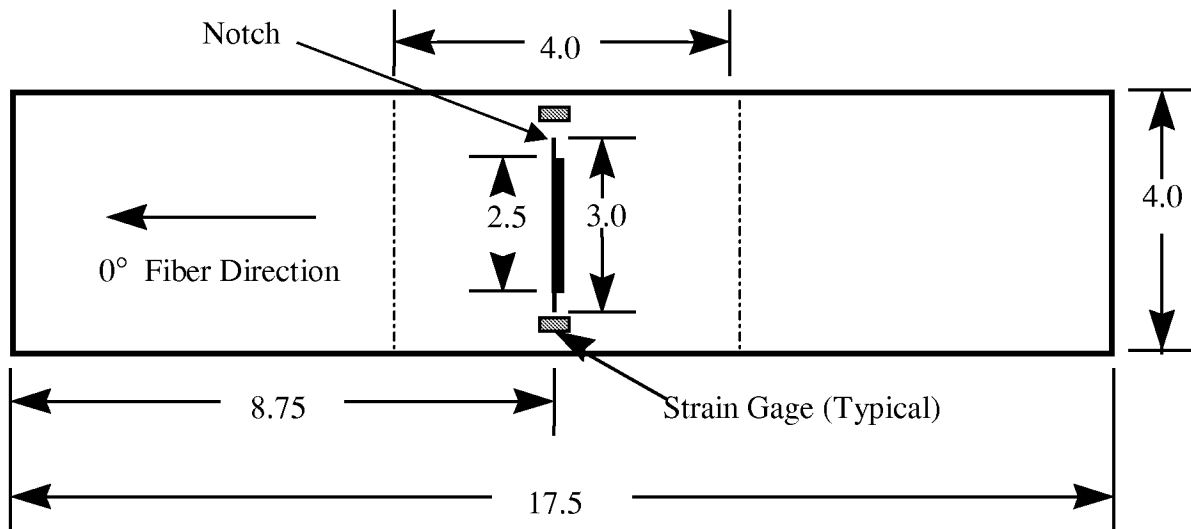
Center notch four-point bend test specimen geometry (Dimensions in inches).
